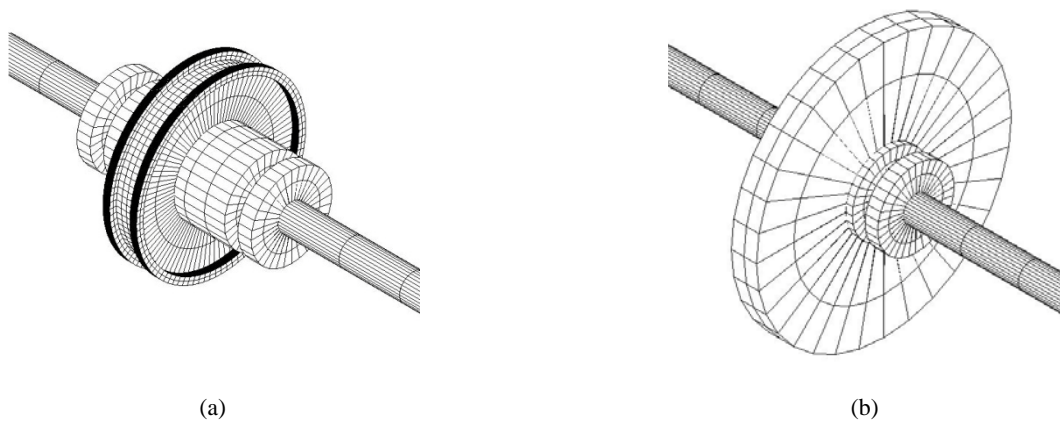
Details of the Finite element mesh: (a) bearing shell, elastomeric damper and journal; (b) disc and disc hub.
